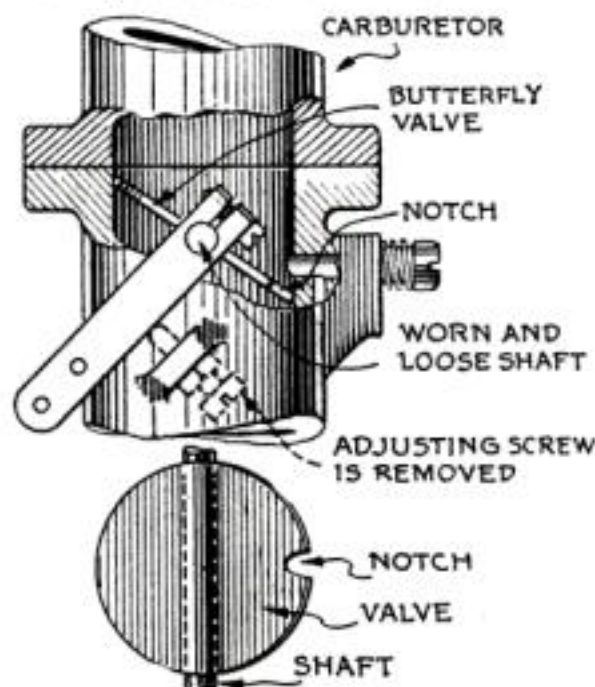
With adjusting screw removed, file a notch in the butterfly valve to govern the idling speed of the motor, when the bearings admit air.
